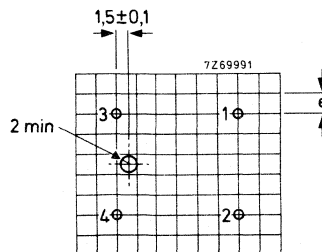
Hole pattern for mounting on a printed-wiring board (component side). Hole diameter  $1,3 \pm 0,1$  mm.  $e = 2,54$  mm (0,1 in).
